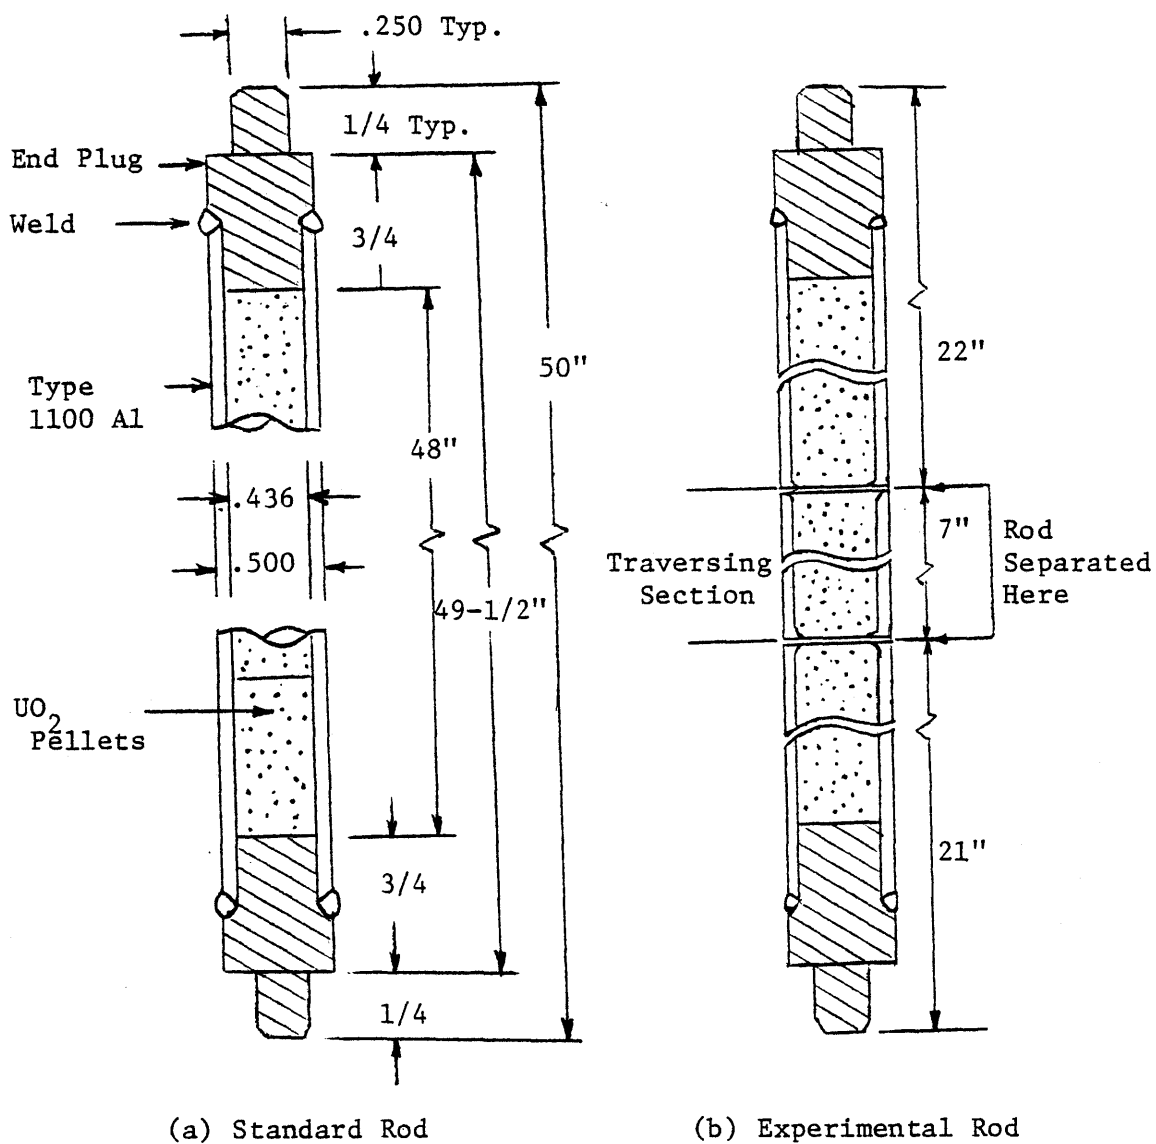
DESIGN OF STANDARD AND EXPERIMENTAL FUEL RODS USED IN THE ITS
